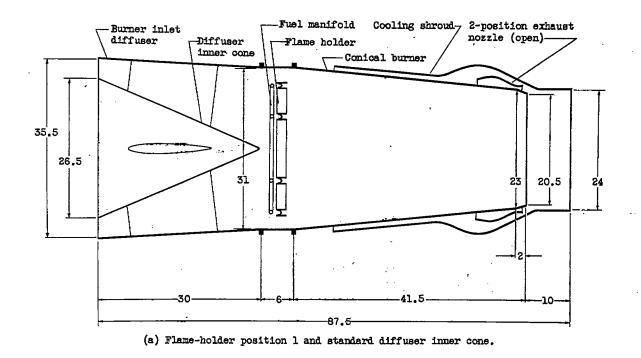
Schematic drawing of engine and tail-pipe burner in altitude chamber.
